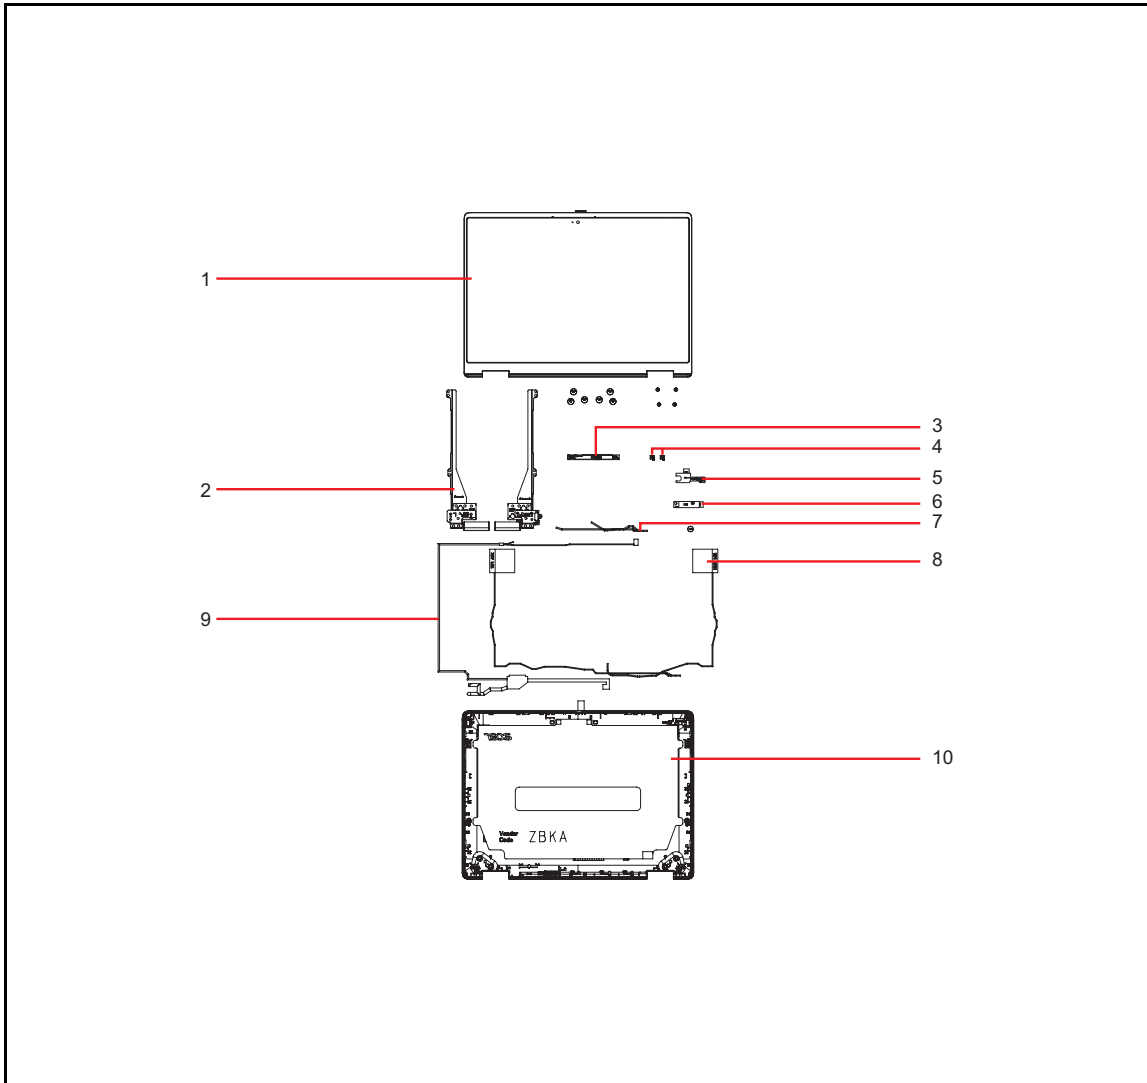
LCD Assembly Exploded Diagram (B311R-32/B311RN-32)
